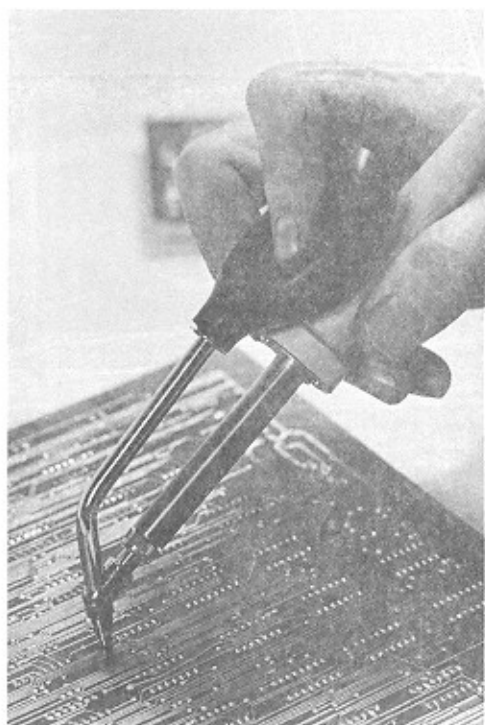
COMPONENT REMOVAL USING COMBINATION IRON AND SOLDER SUCKER
